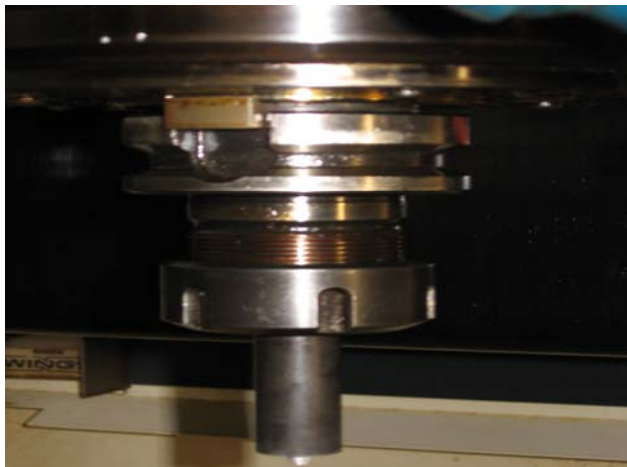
FSW using Makino 3-axis computer numerical controlled milling machine.
